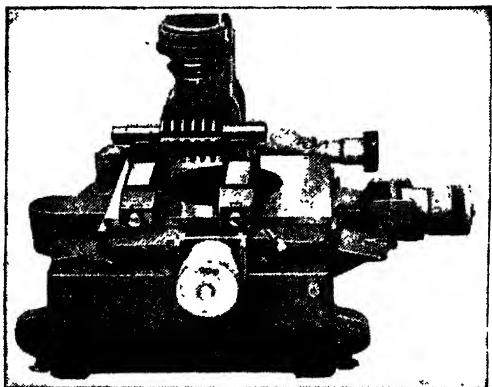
Close-up of an Optical Measuring Machine Checking a Job.
